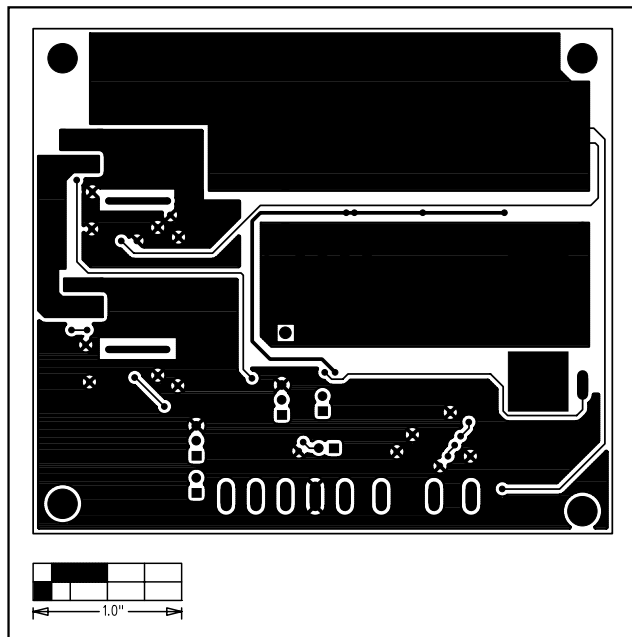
MAX5040 EV Kit PC Board Layout—Solder Side
